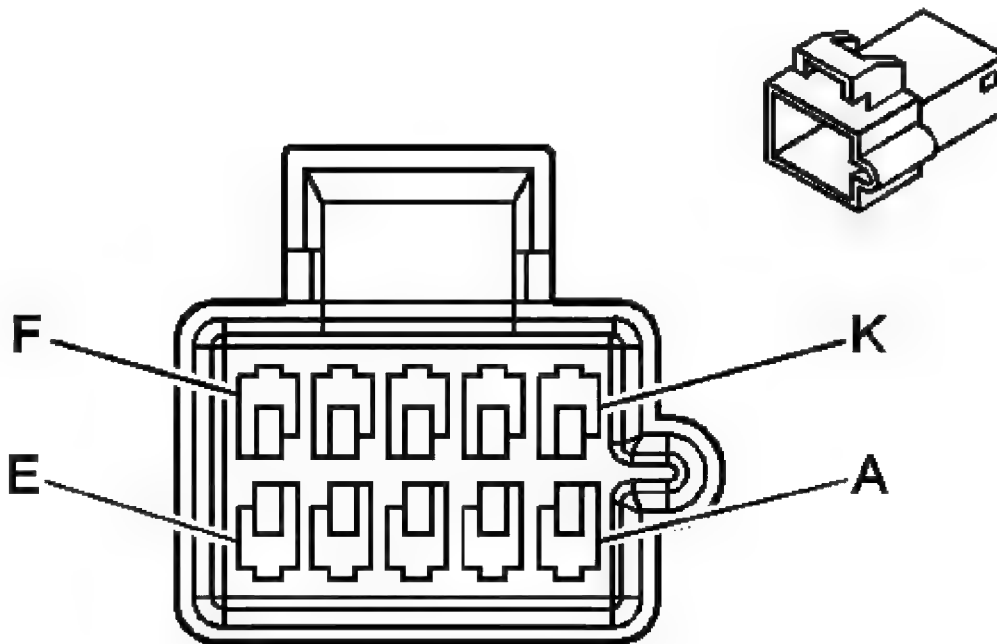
Inflatable Restraint Steering Wheel Module Coil C2 Connector End View
